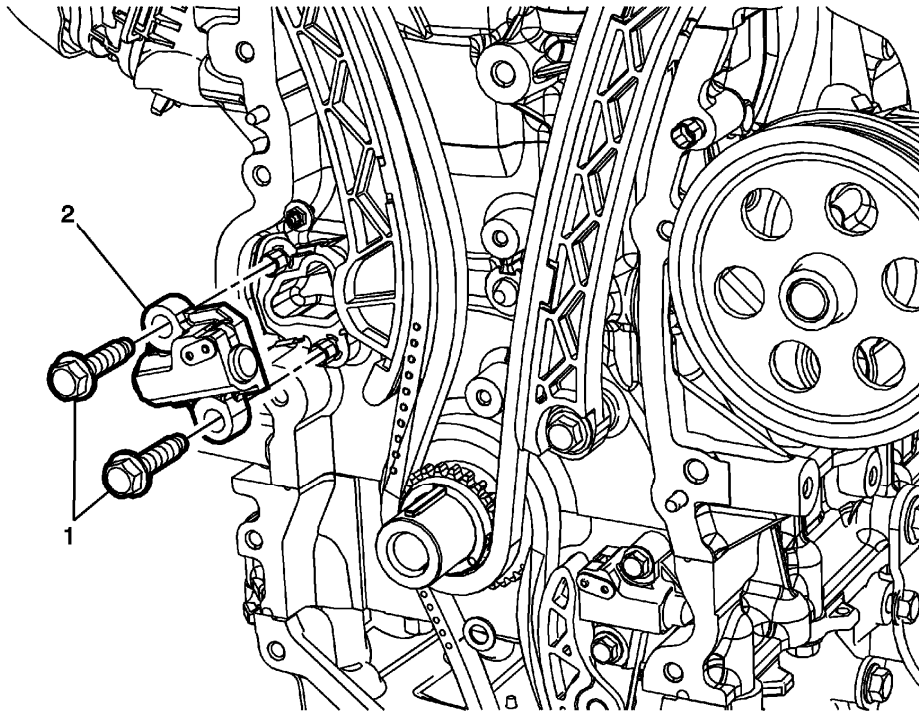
Timing Chain Tensioner Bolts And Timing Chain Tensioner
